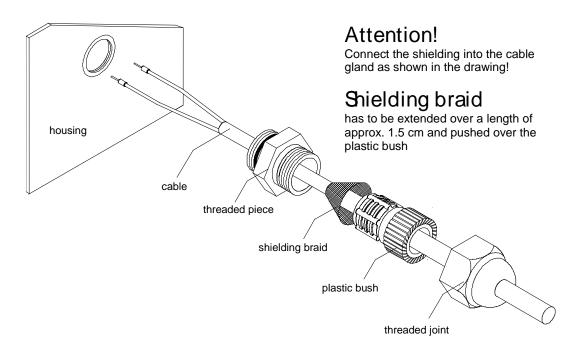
Assembly of the screwed EMC cable gland, connection of the shielding
